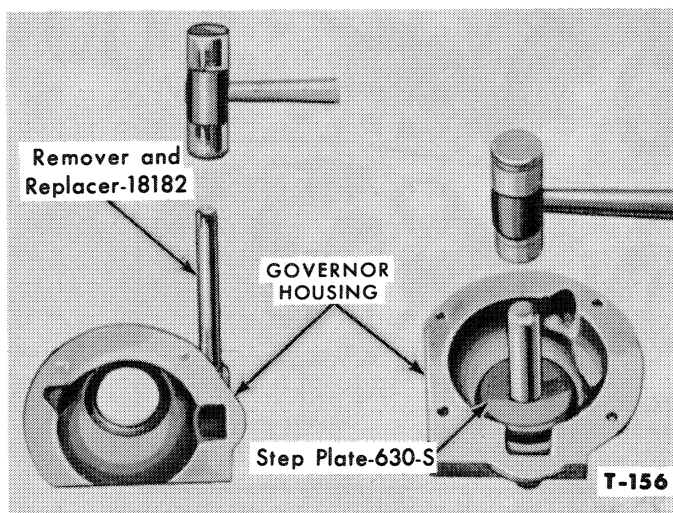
Removing or Installing Needle Bearings and Installing Crankshaft Oil Seal
